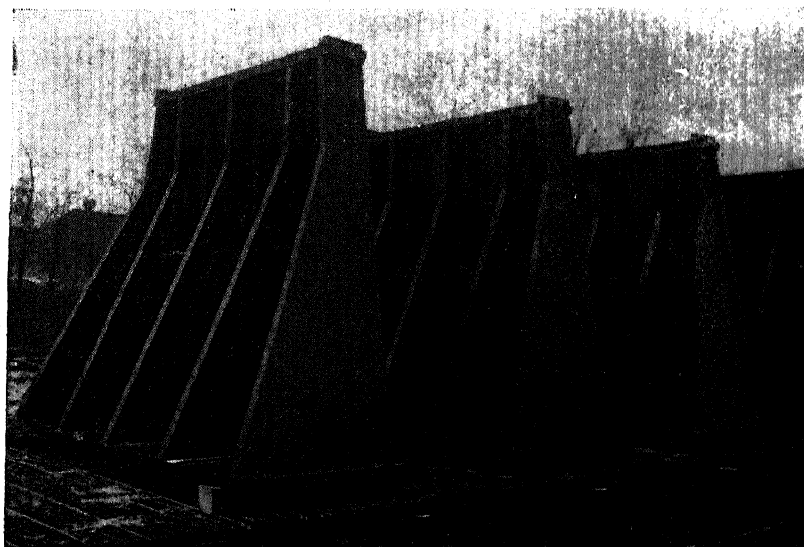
A group of ladle stands fabricated from heavy flame-cut steel plate by arc welding.
